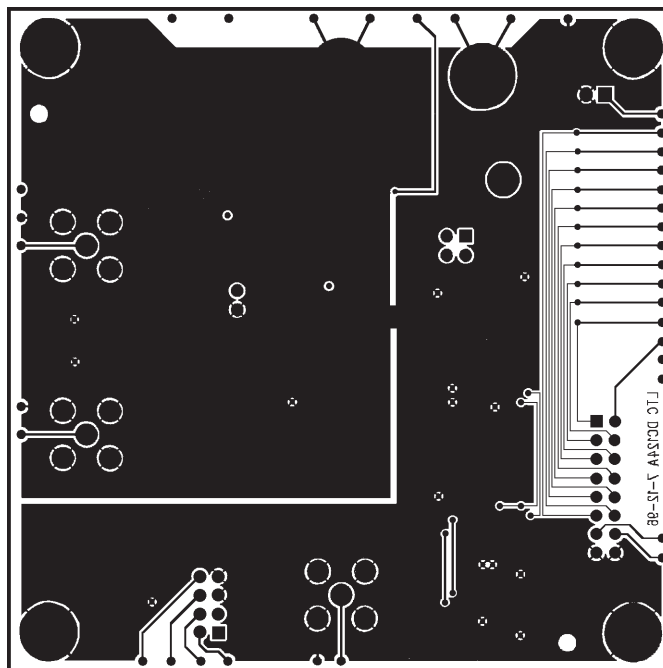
Suggested Evaluation Circuit Board Solder Side Layout
